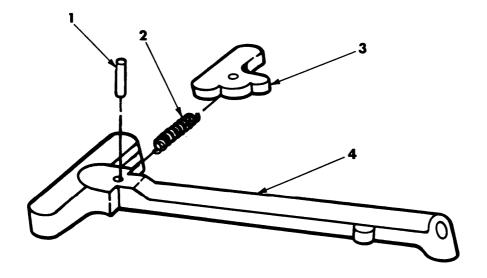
Charging Handle Assembly (8448517) (Group 0301).
